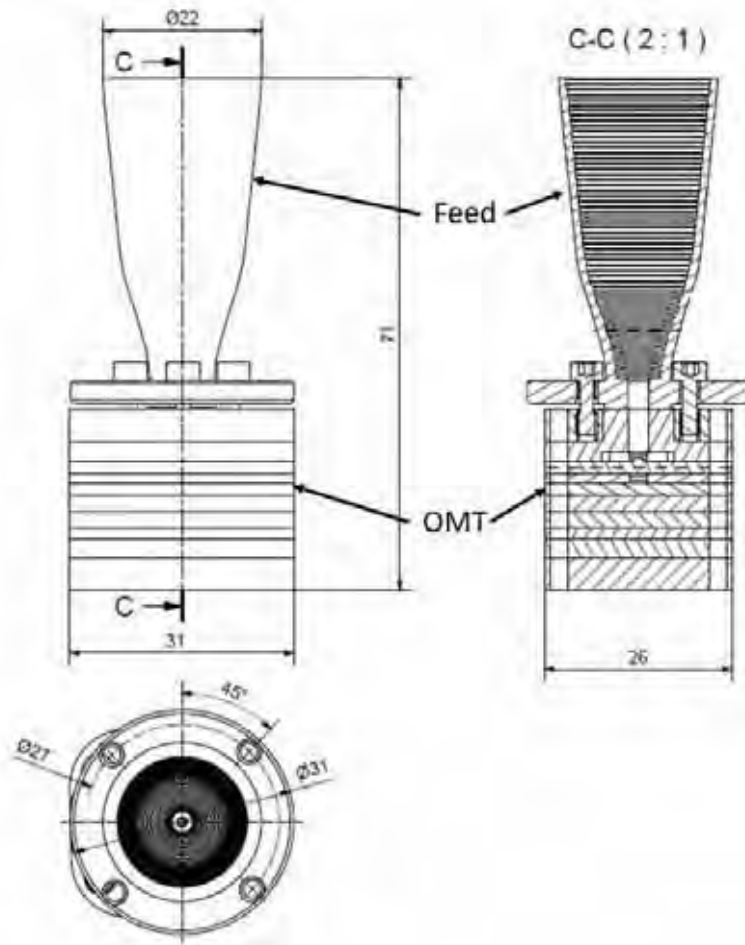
Mechanical drawings of the platelet W-band feed-horn and OMT assembly with 31 mm footprint designed by INAF for the SRT Gregorian focus (70-116 GHz).
